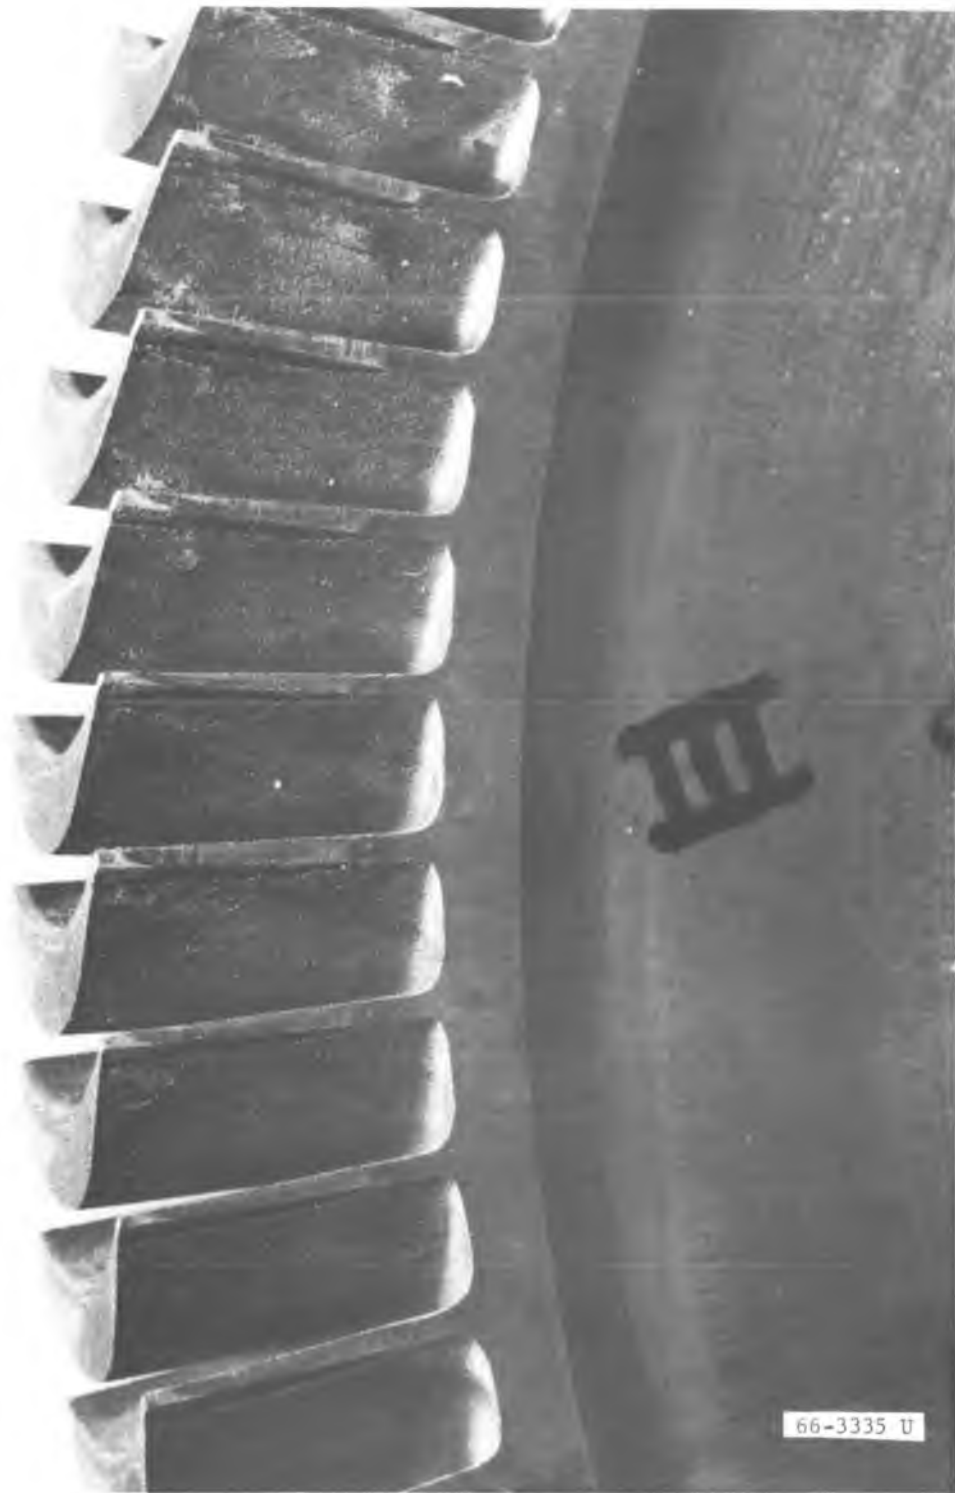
TURBINE BLADES AFTER ENDURANCE TEST, 30 DEGREE BLADE ANGLE SECTION III
